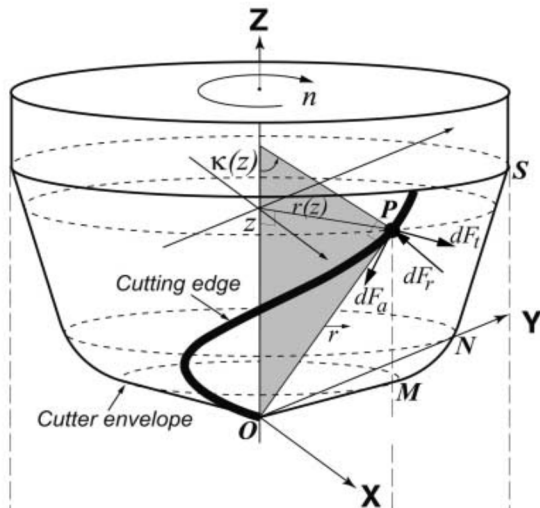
General Tools for displaying of geometrical parameters of Cutting Tool [7]
